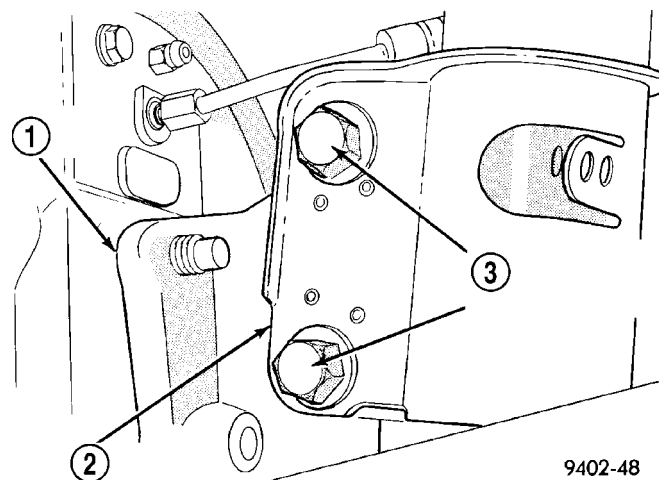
Rear Strut Clevis Bracket Attaching Bolts
